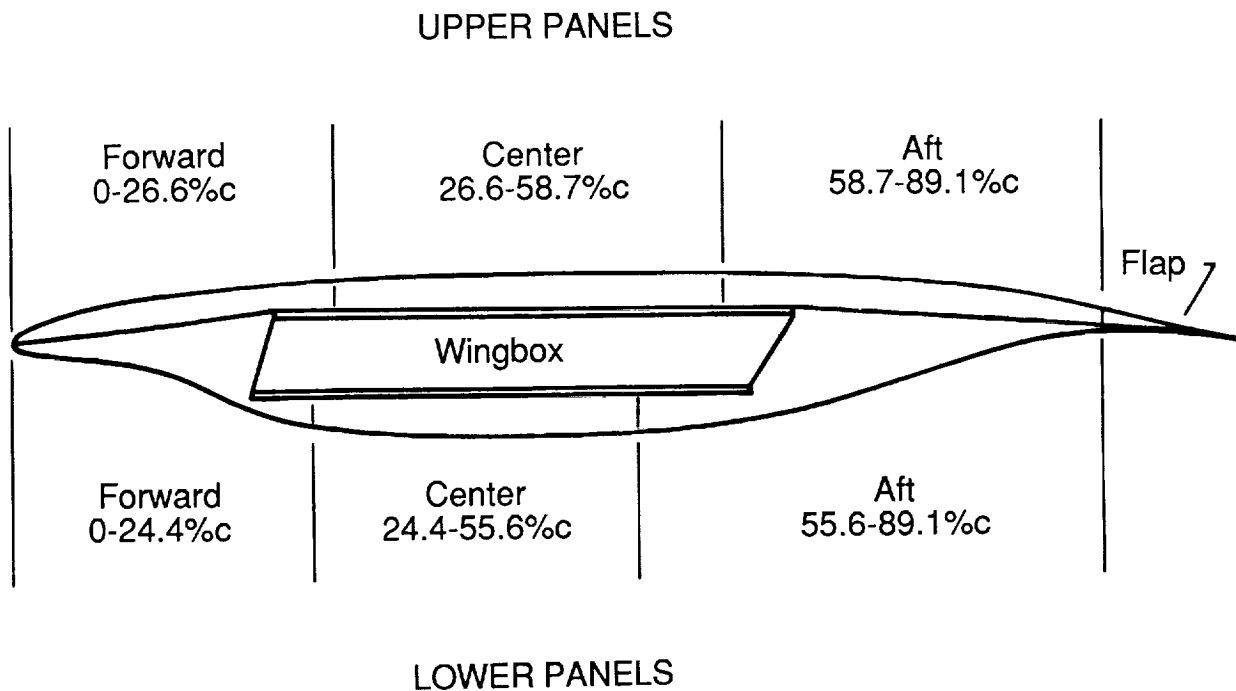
Schematic of SCLFC(1)-0513F airfoil wingbox and suction panel assembly.
